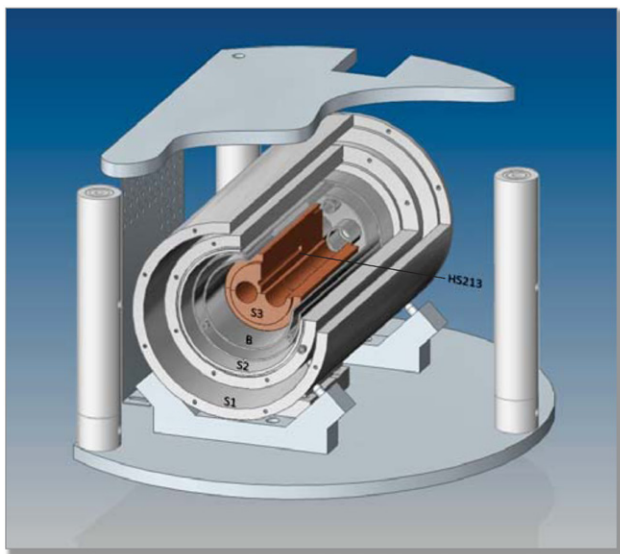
Exploded view of the vacuum system along with thermal and magnetic shielding.
